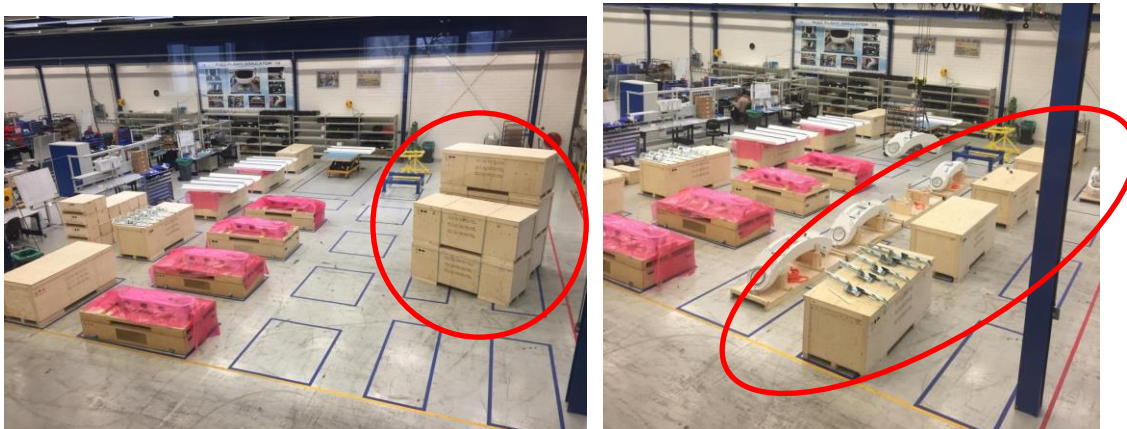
CDs placed on Workstation for VBS (Left) and Randomly placed CDs on the Work Floor (Right)
